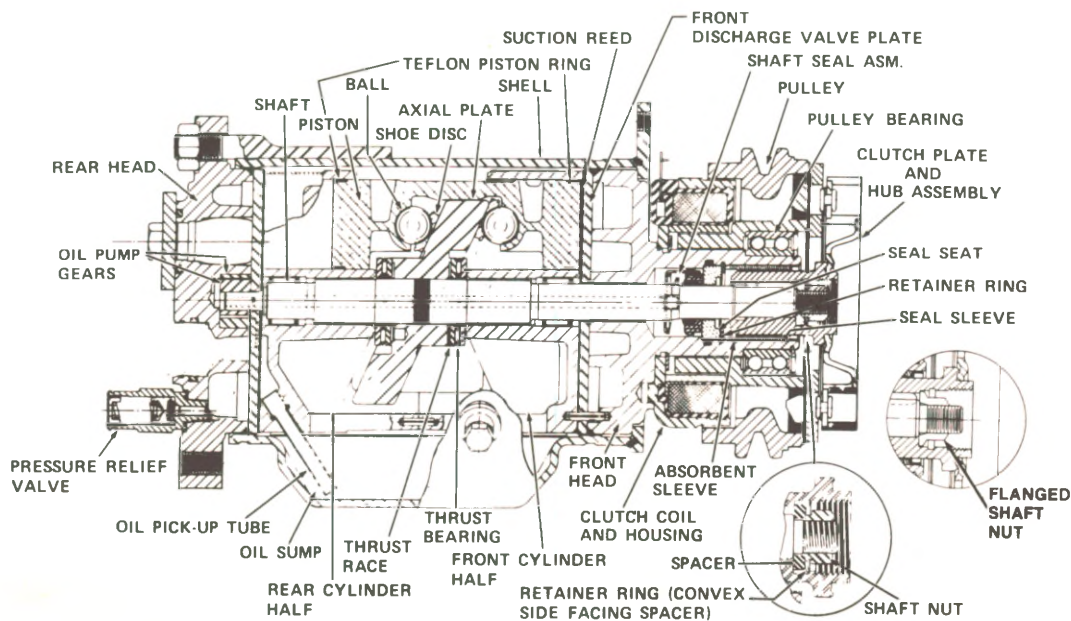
GM 6 Cylinder Compressor — Internal
